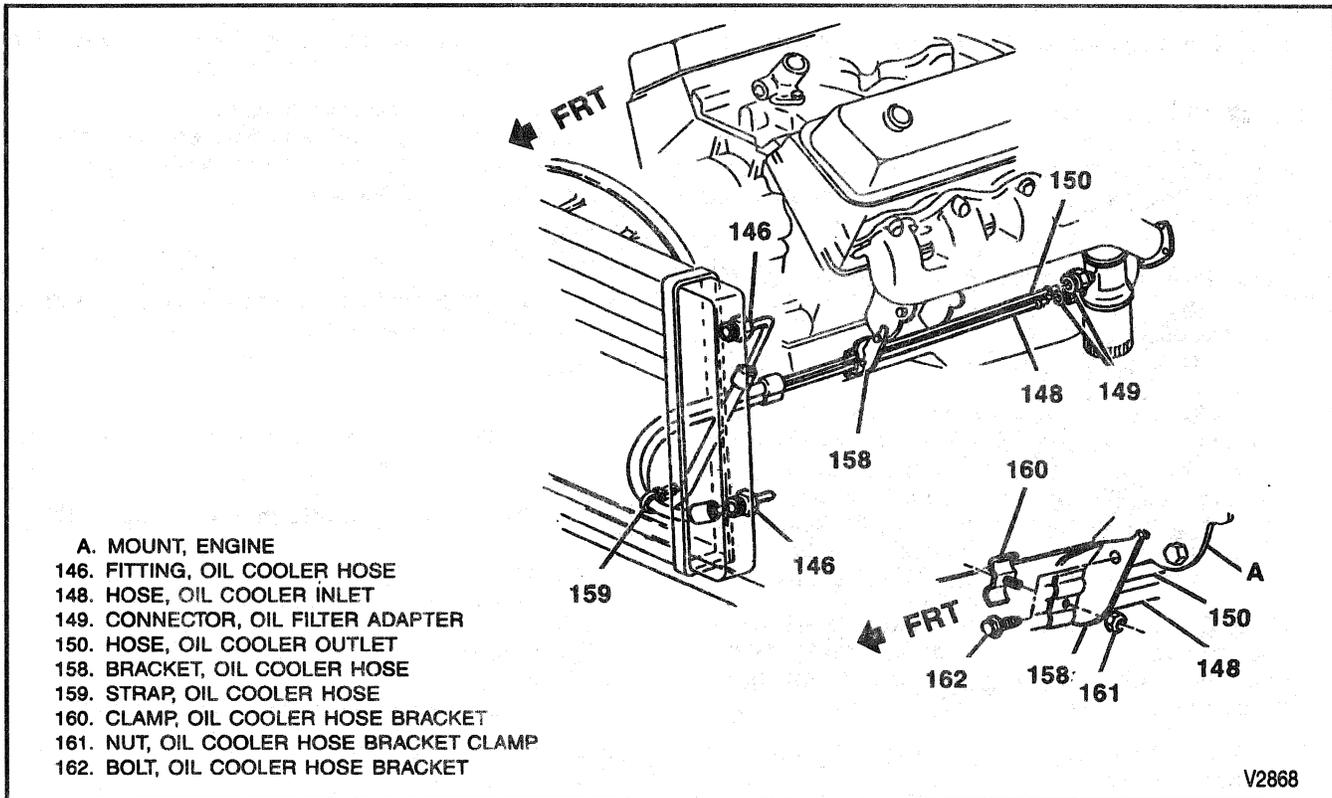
Engine Oil Cooler Lines and Components (5.0L and 5.7L Engines with Engine Oil Cooler)
